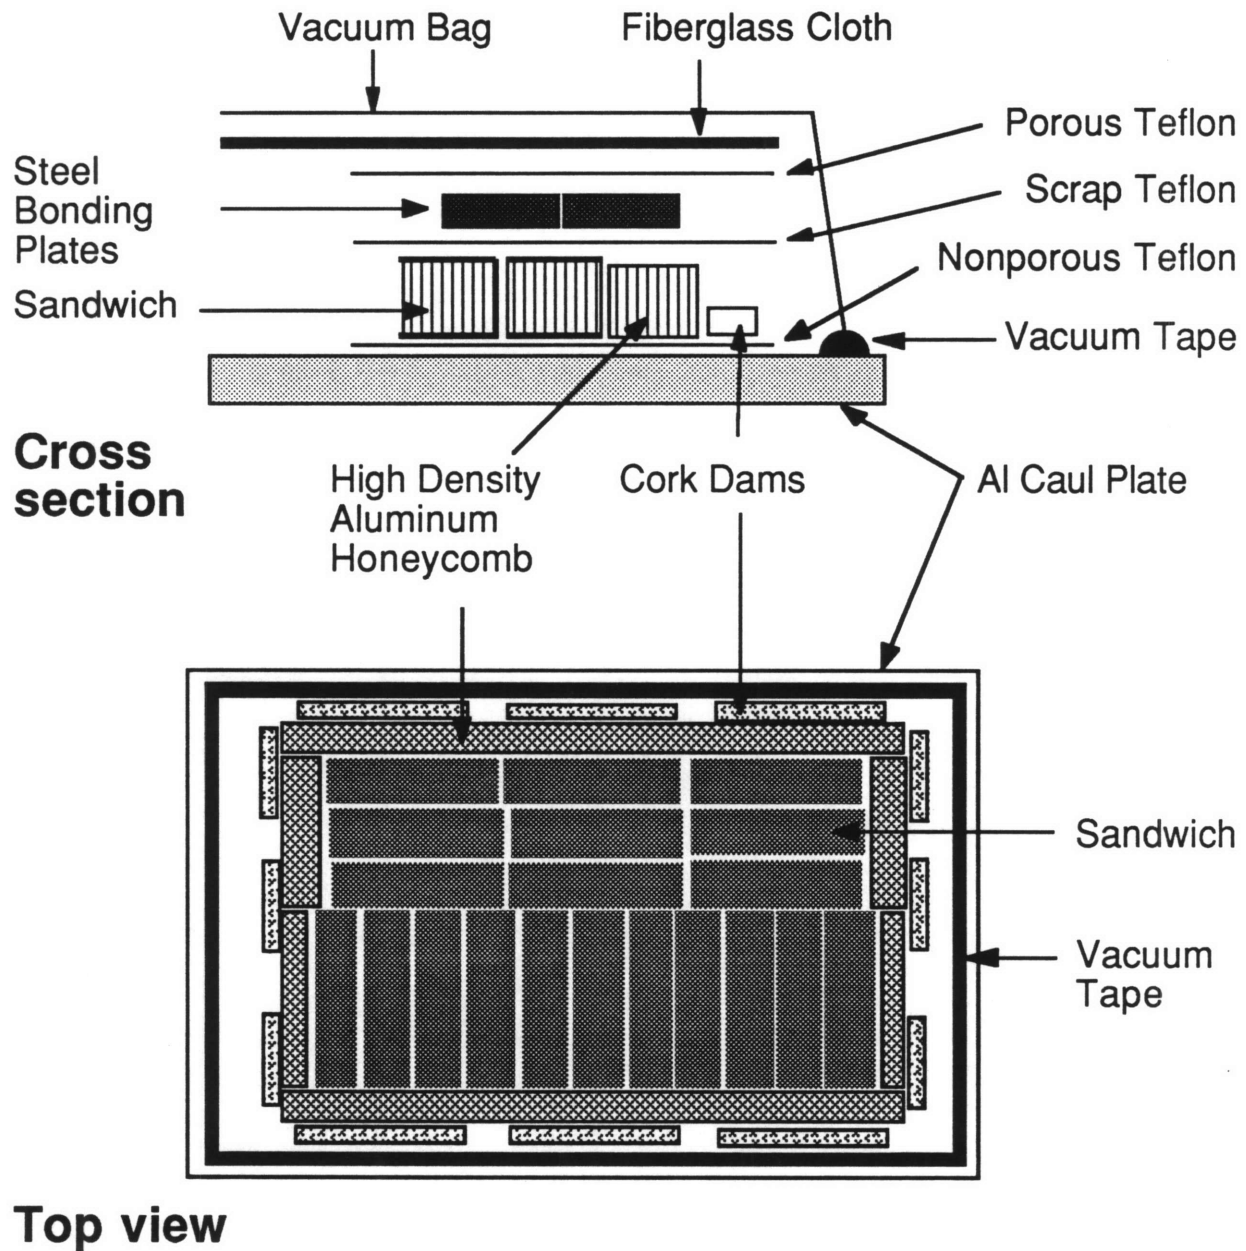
Illustration of Cure Assembly for Bonding Facesheets to Core.
